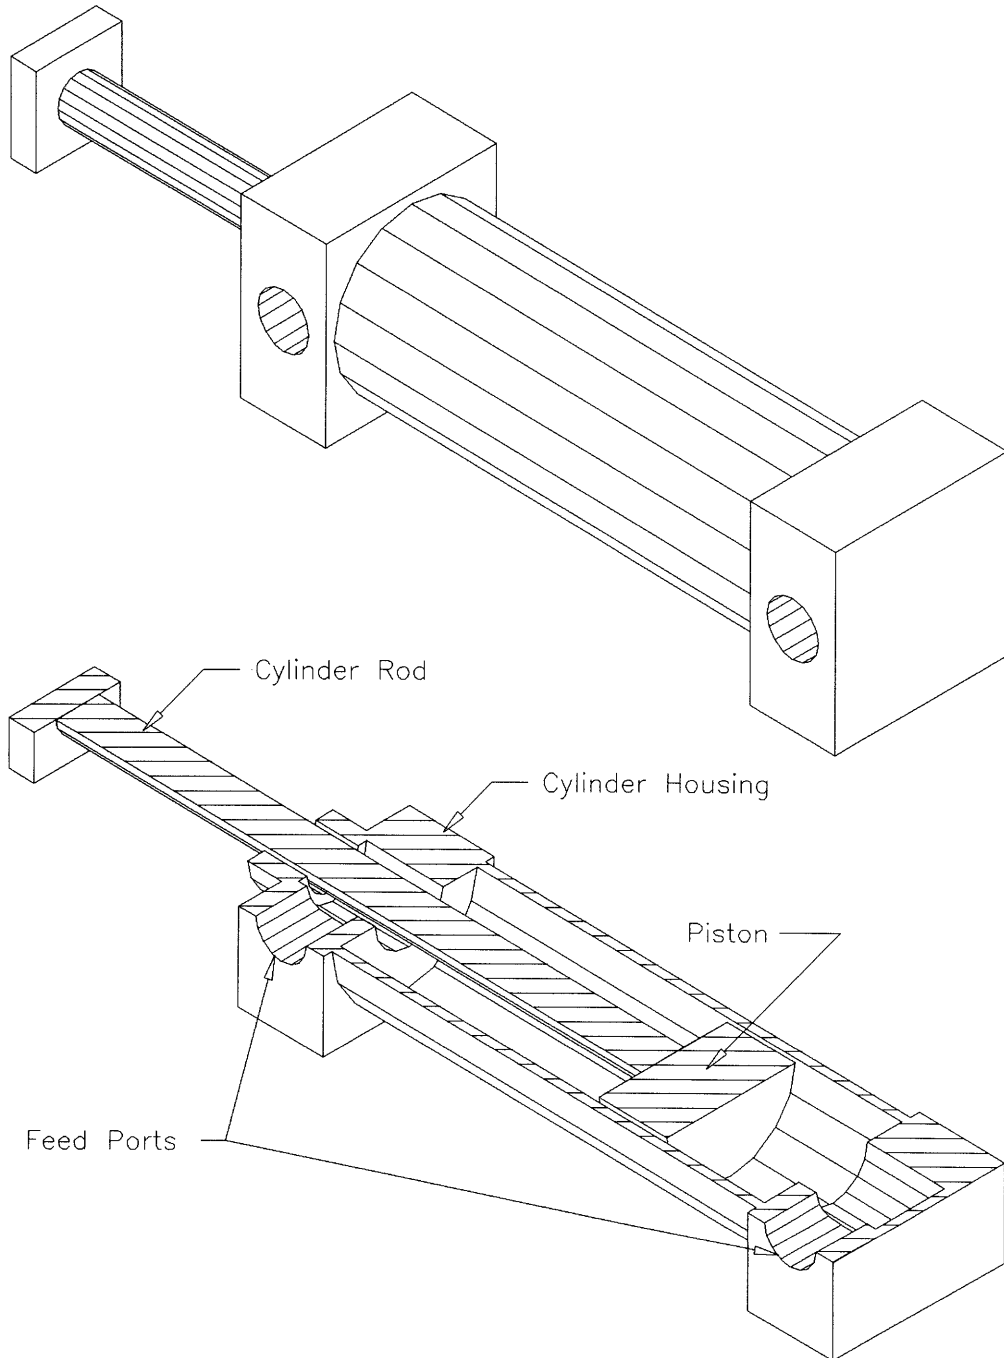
Typical pneumatic/hydraulic double-acting cylinder used for module movement including a cross-sectional view.
